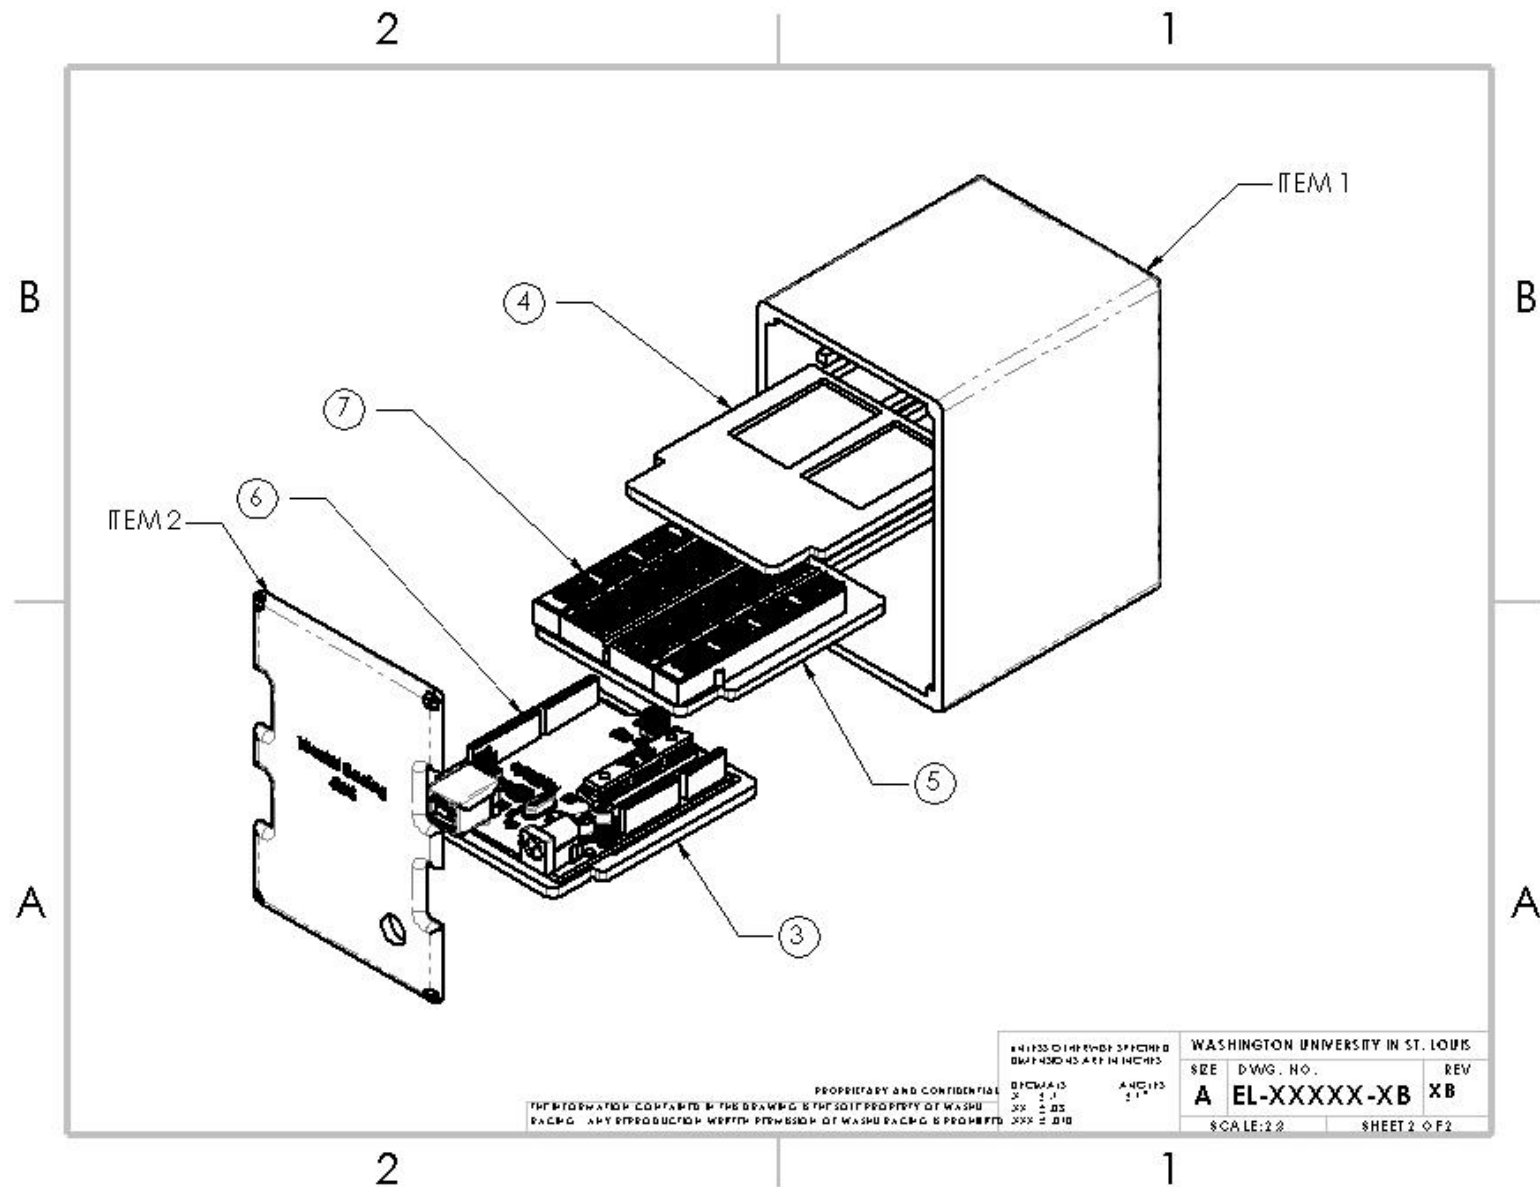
Assembly Drawing for Arduino case (sheet 2).
